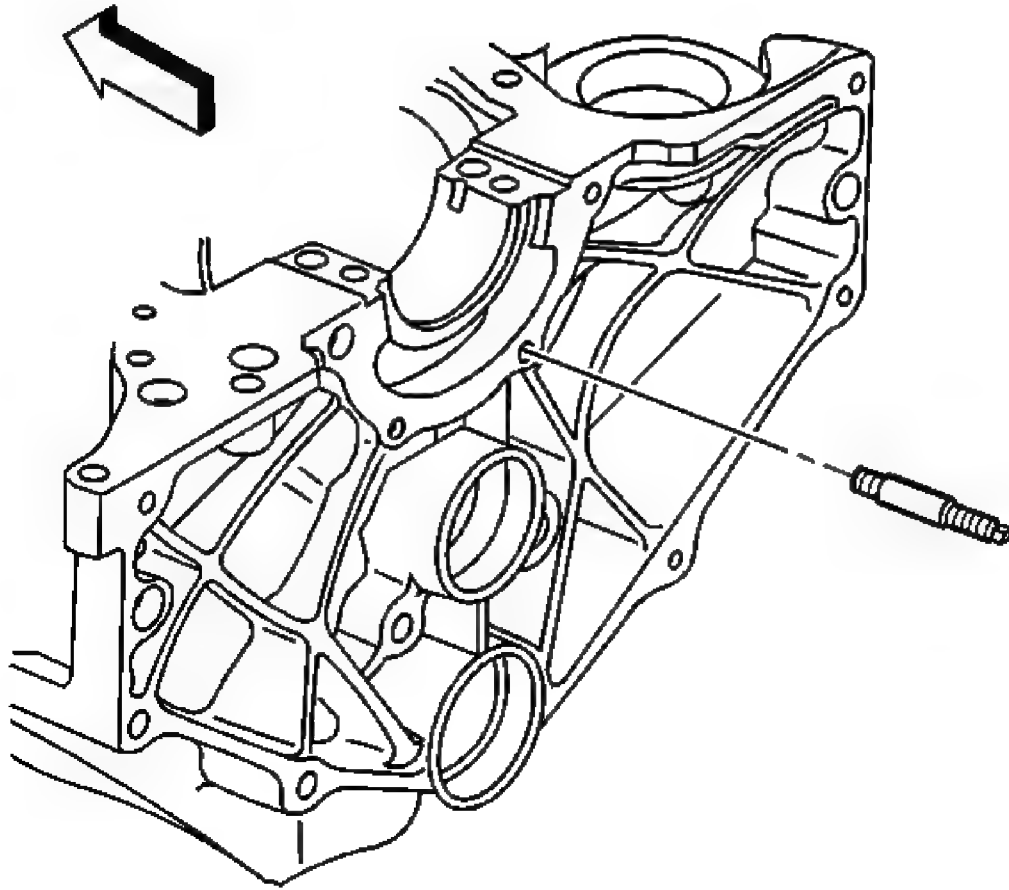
Locating Crankshaft Rear Oil Seal Housing Retainer Stud
